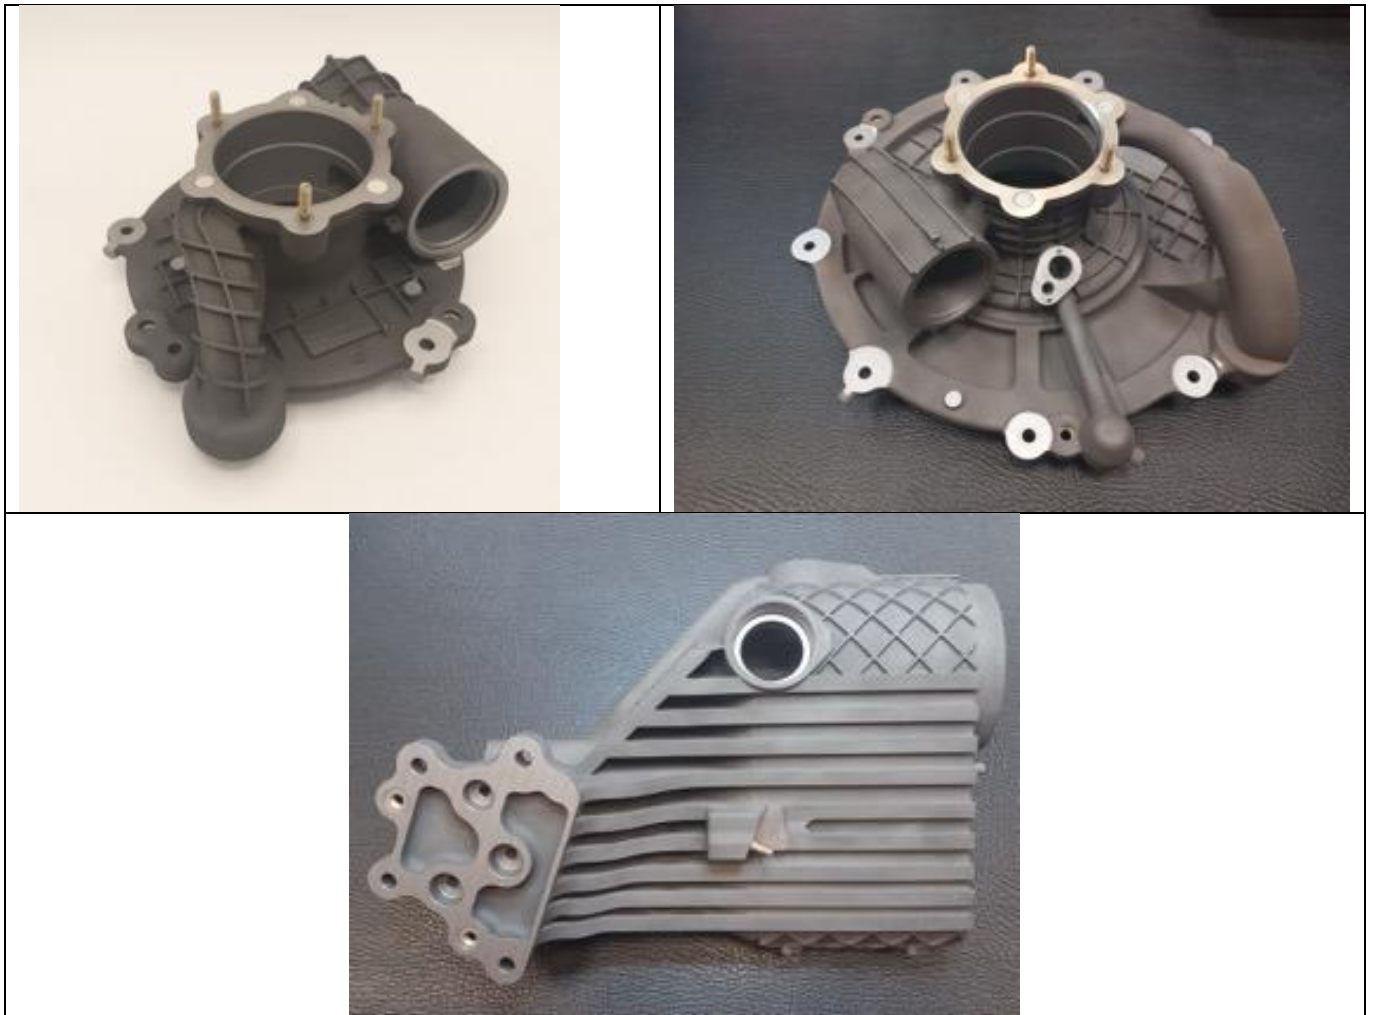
Final components: Oil pump cases (LH and RH), and Auxiliary tank (LH),
